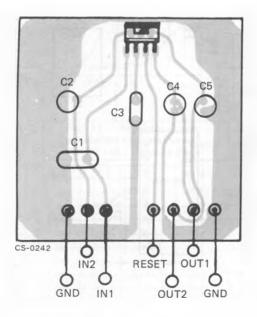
P.C. board component layout of fig. 2 (1: 1 scale)
